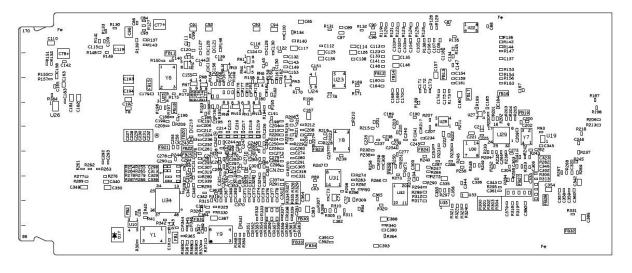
C6474 Lite EVM Board layout – Bottom view
